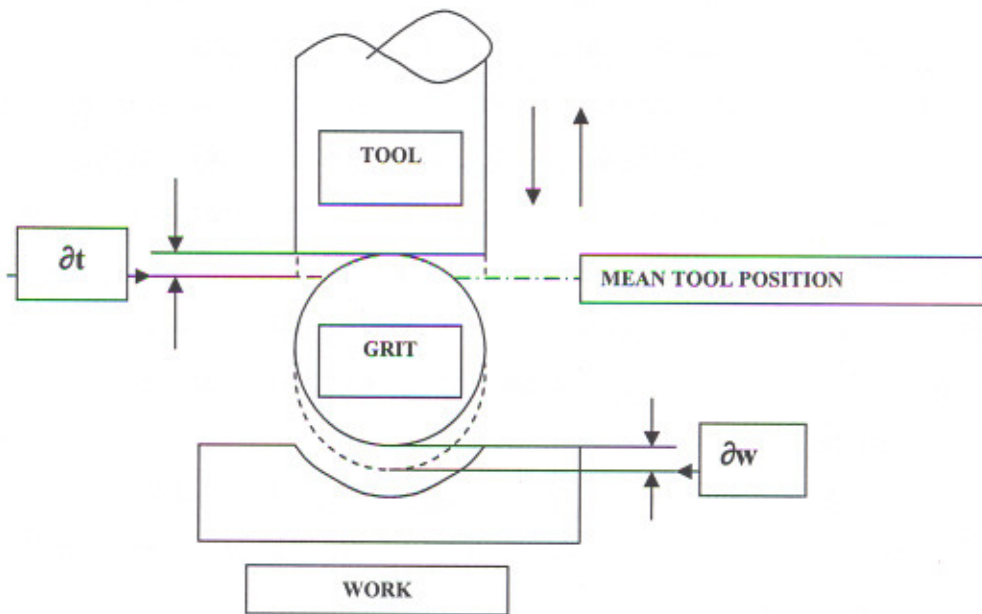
Schematic diagram of Impact ultrasonic machining [81].
